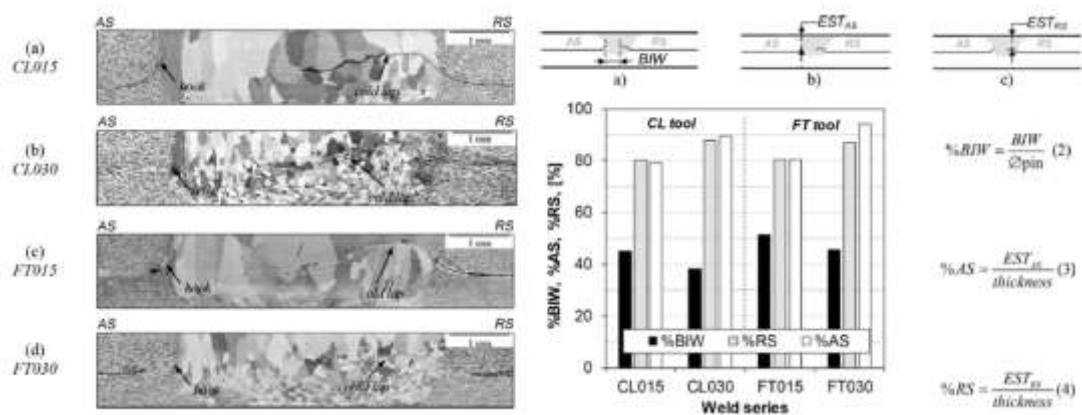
Hook and cold lap defect details (left); and EST and BIW representation (right) in FSLW joints performed by several probe designs and welding parameters [75].
